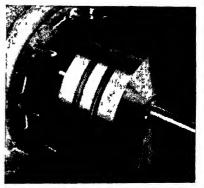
Aluminum piston made from solid casting. (Courtesy of American Air Compressor Corp.)
